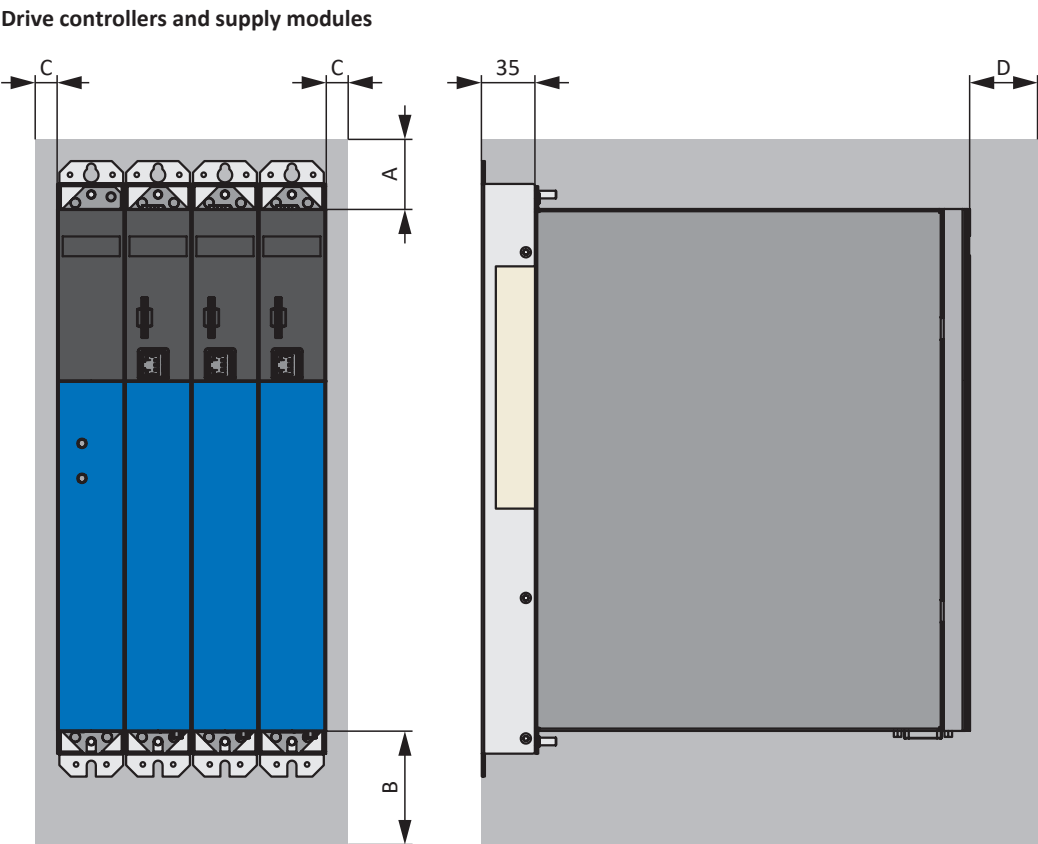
Minimum clearances for drive controllers in combination with a PS6A24 or PS6A34 supply module
